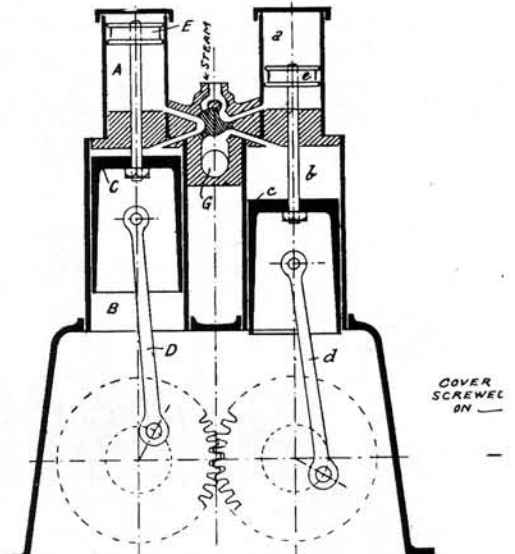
Valve Arrangement For Compound Marine Engine.
